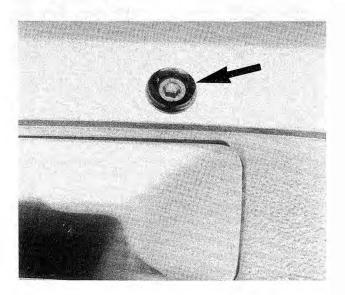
Mounting bolt (arrow) for one-piece bumper. Remove bolts from both sides.
